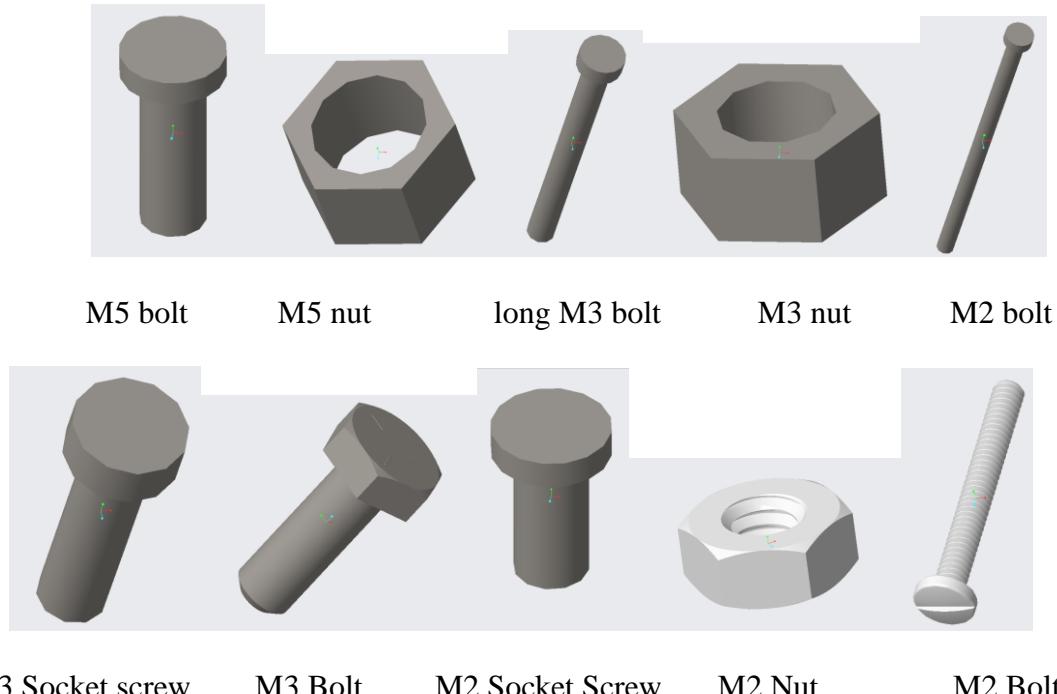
Misc Screws/Bolts/Nuts Thumbnails
